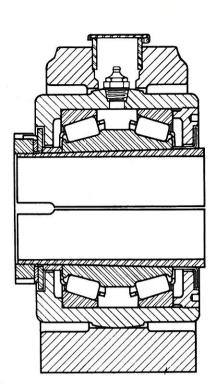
Section through expansion type pillow block with straight bore in cap and base. This design of adaptor used for bearings with shaft diameters of 1-15/16" to 3-7/16" inclusive.
